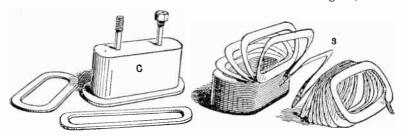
Core and edge strip winding for shunt field coils of large multipolar dynamo. The winding consists of a copper strap S carefully insulated and placed edgewise on the core C in a single layer of winding. With this arrangement, the space occupied by insulation is reduced to a minimum, and, although the cooling surface is small, each turn of the winding has one edge on the outer surface, being ample for adequate cooling.
